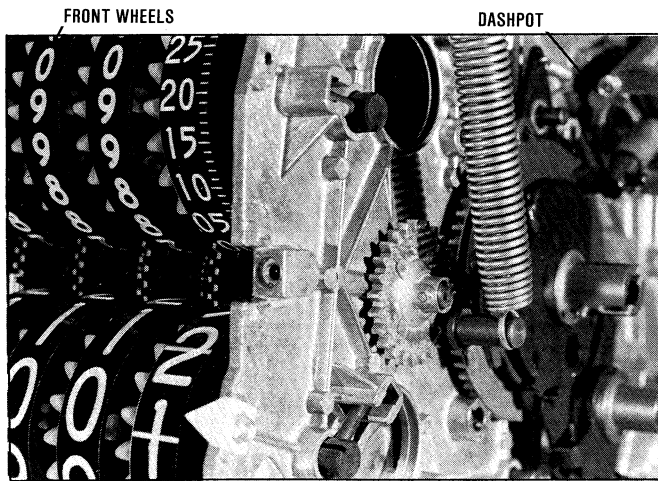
Front wheel shaft pins resting on the bottom of their slots.
